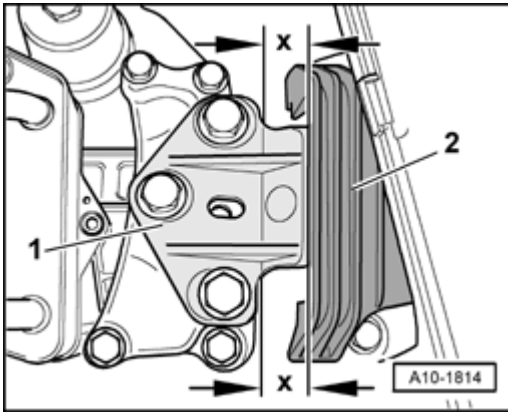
Ensuring Edges On Support Arm And Transmission Mount Are Parallel
